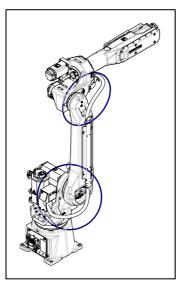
(a) Inspection points of the mechanical unit cables
